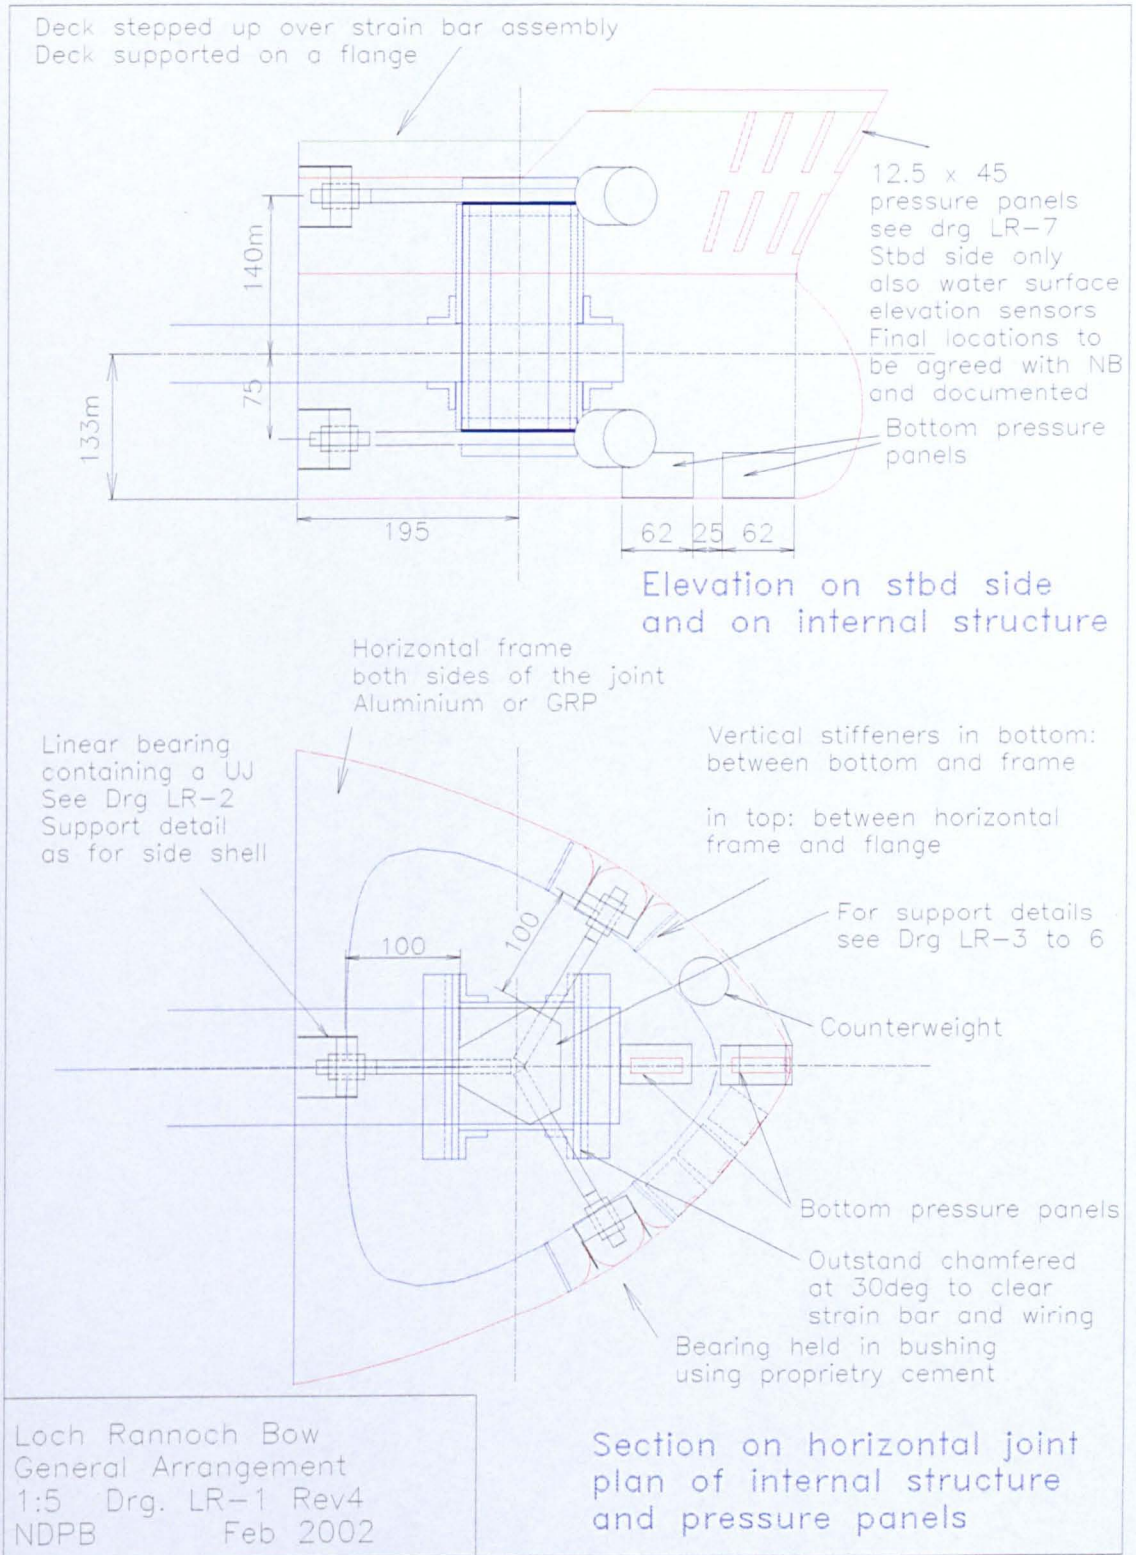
View on Loch Rannoch bow showing strain bars, strain gauges and the inner parts of the linear bearing which enclose the universal joints
